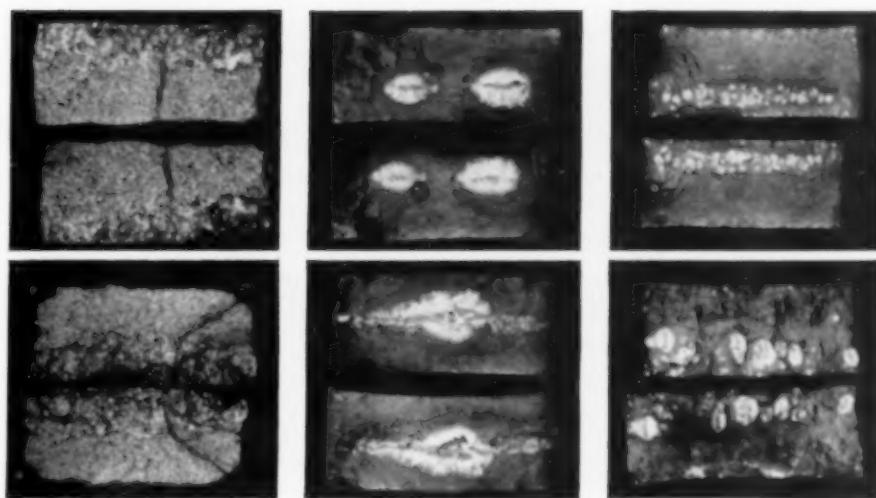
Tensile Fracture Through Weld Metal, Illustrating Three Visual Types of Hydrogen Embrittlement. Full size. At left is completely embrittled metal, at center is "silver streak", at right are "fish-eyes"
